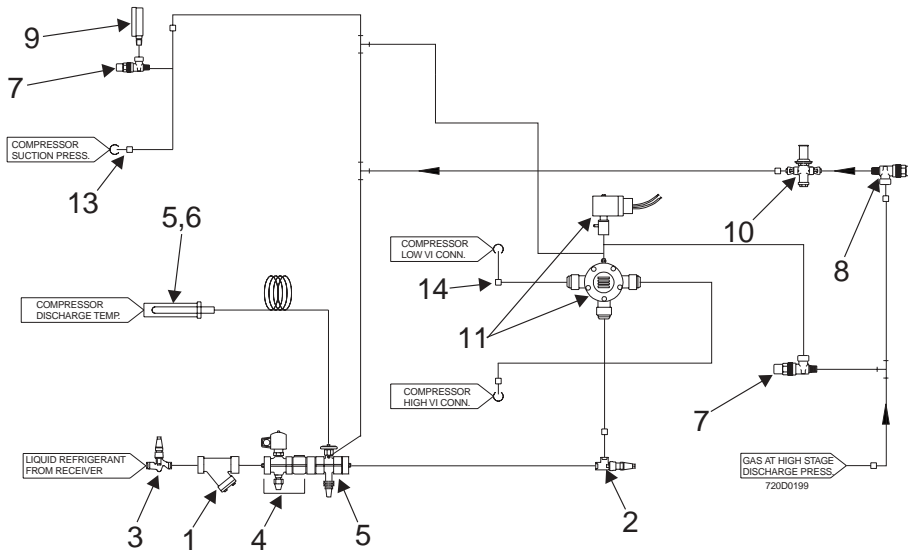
720D0199 Liquid Injection, Dual Port, Socket Weld
